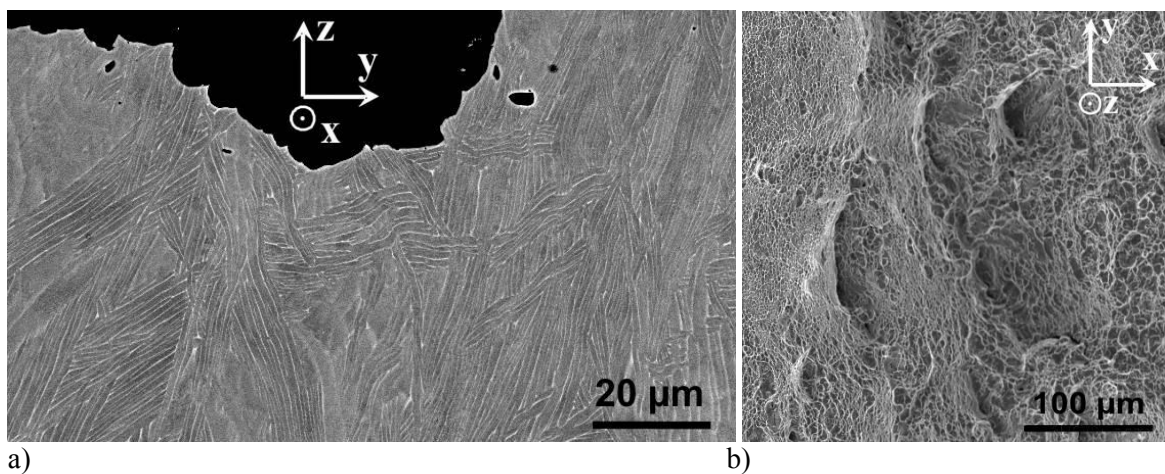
Cross section at fracture site (a) and fracture surface (b) of small tensile specimens from component A
